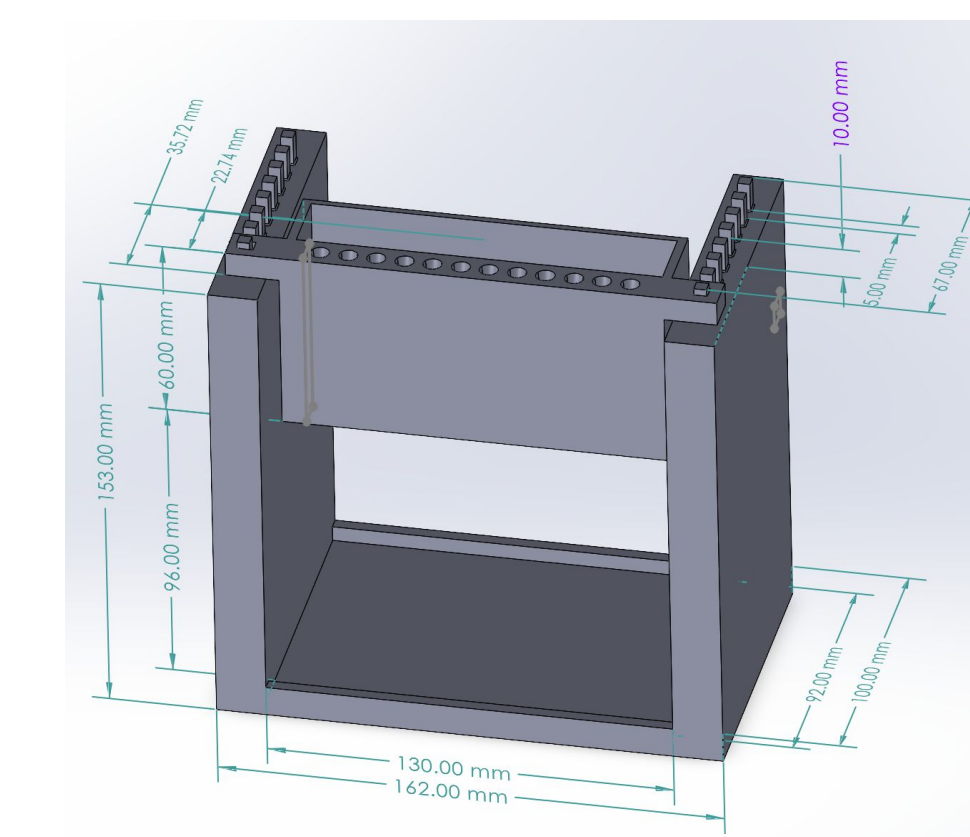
Dimensioned CAD model assembly of well plate frame and compartments
